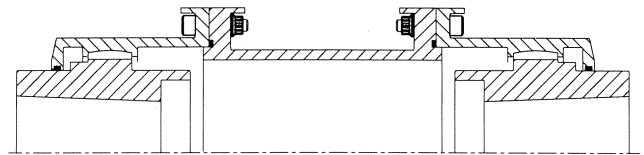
Special Purpose Sealed Lubricated Gear Coupling.
